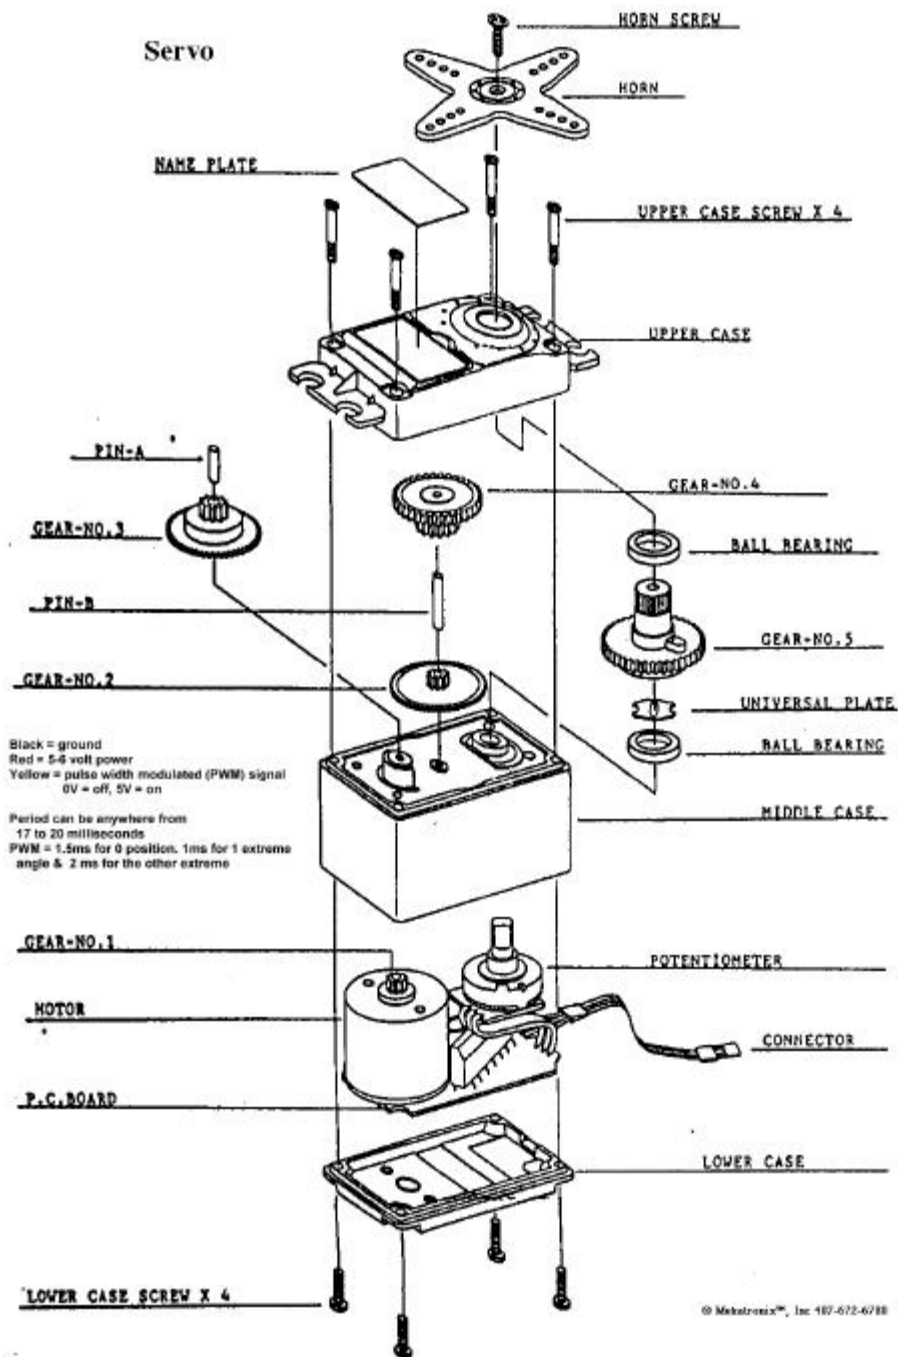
Exploded view of a another type of servo illustrating the gear arrangement and assembly/disassembly.
